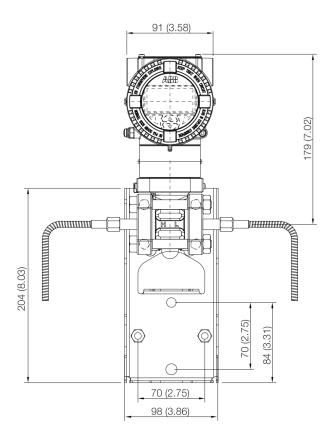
Dimensions - DIN housing with mounting bracket for vertical or horizontal mounting on 60 mm (2 in.) pipe
